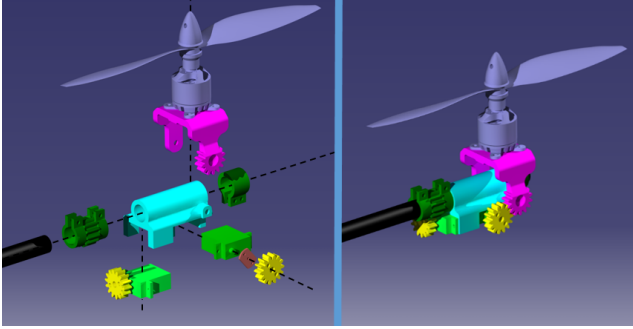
Render of the tilting mechanism, exploded view on the left side and isometric view on the right side.
